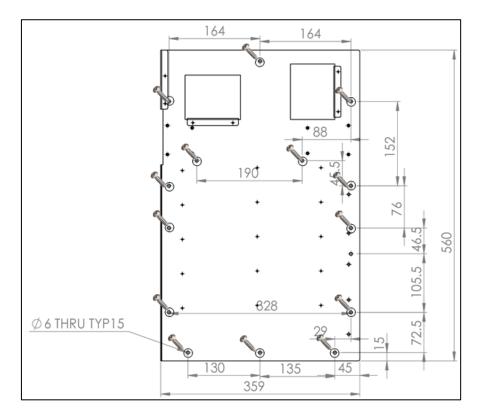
Platinum Pro 50 and Platinum Touch 50 Back Panel Dimensions
